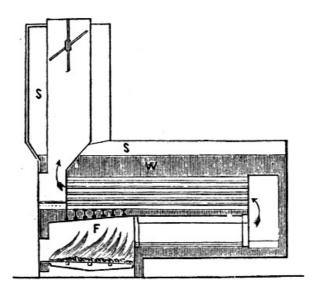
Stevens's Return Tubular Boiler, 1832.
